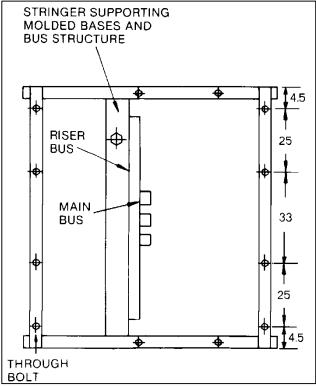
Location of through-bolts, see Fig. 4-7 (dimensions in inches)
